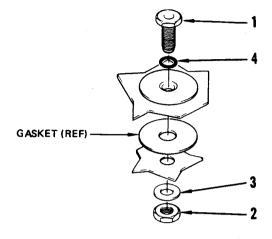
Removal; Main Sump Tank (Sheet 4)
